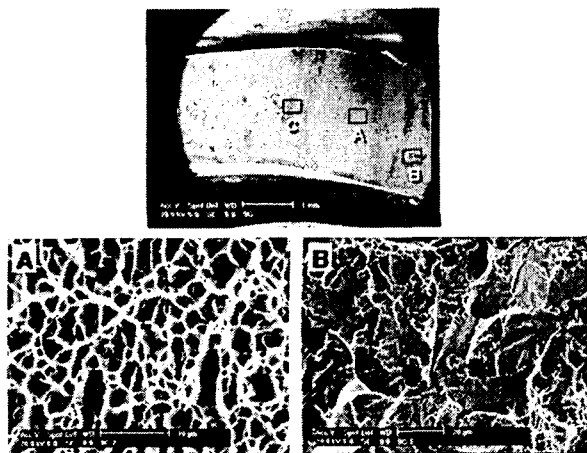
Fractographs of the flash butt welded joint of 590DP steel after Erichsen test.
